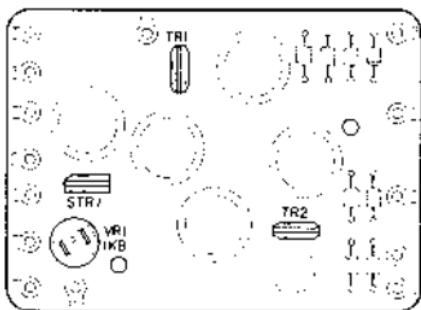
X1-SII44 POWER SUPPLY P.C. BOARD
